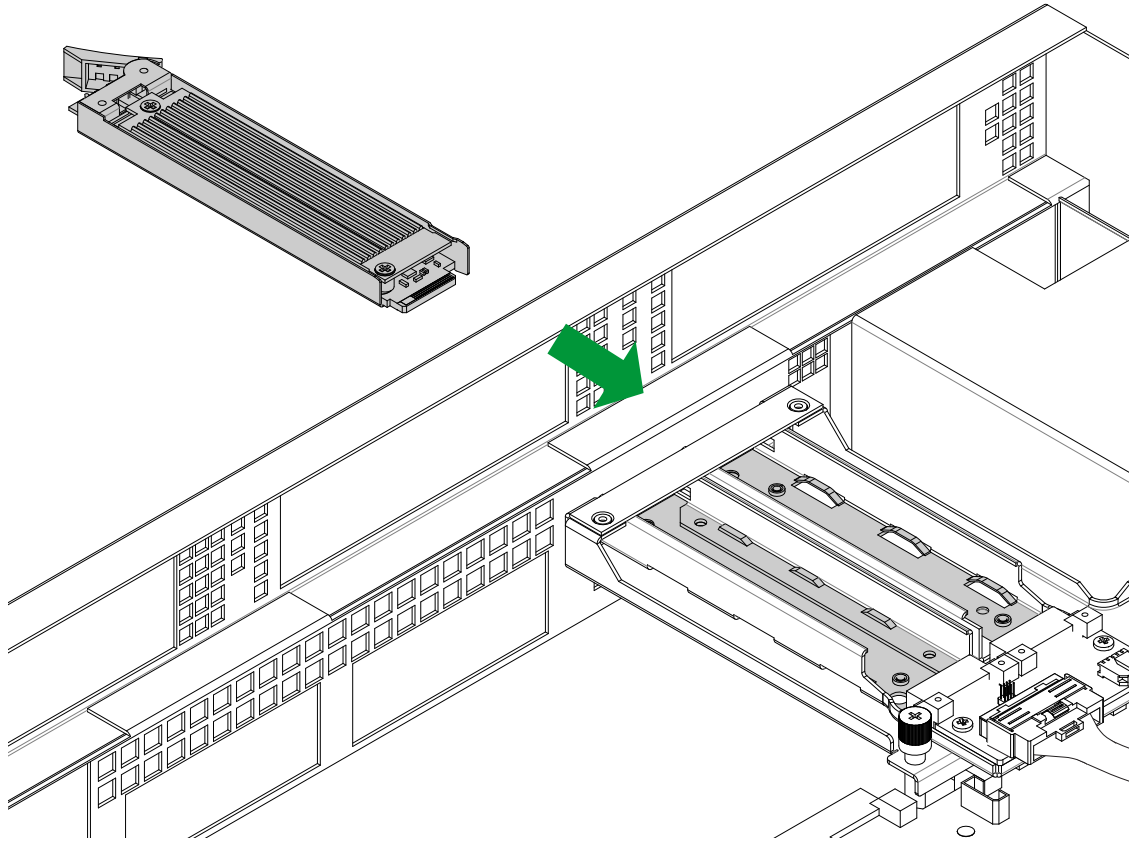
Slide the M.2 Adapter Tray Assembly Into the Holder Bracket
